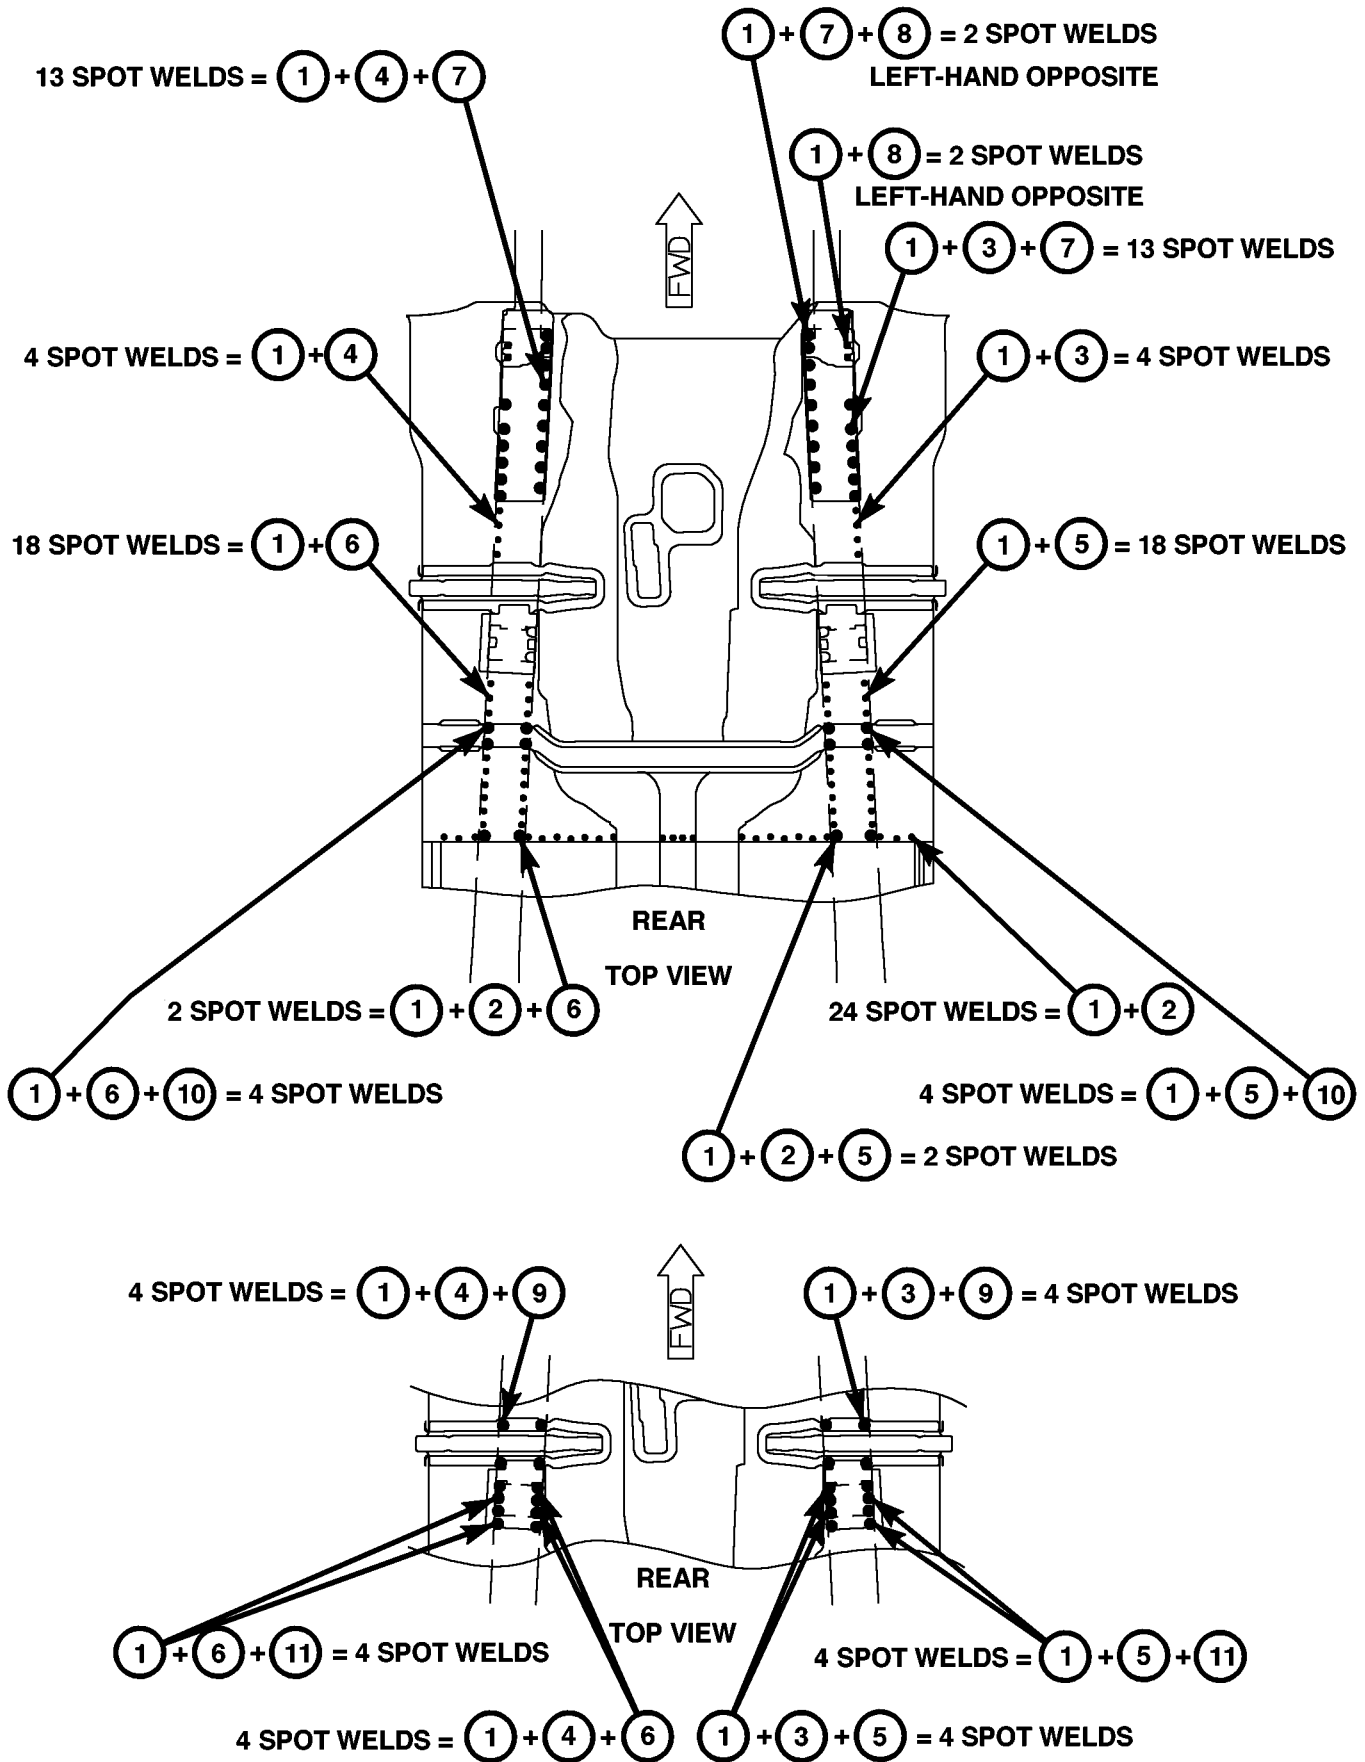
FRONT RAILS - WELD LOCATIONS
